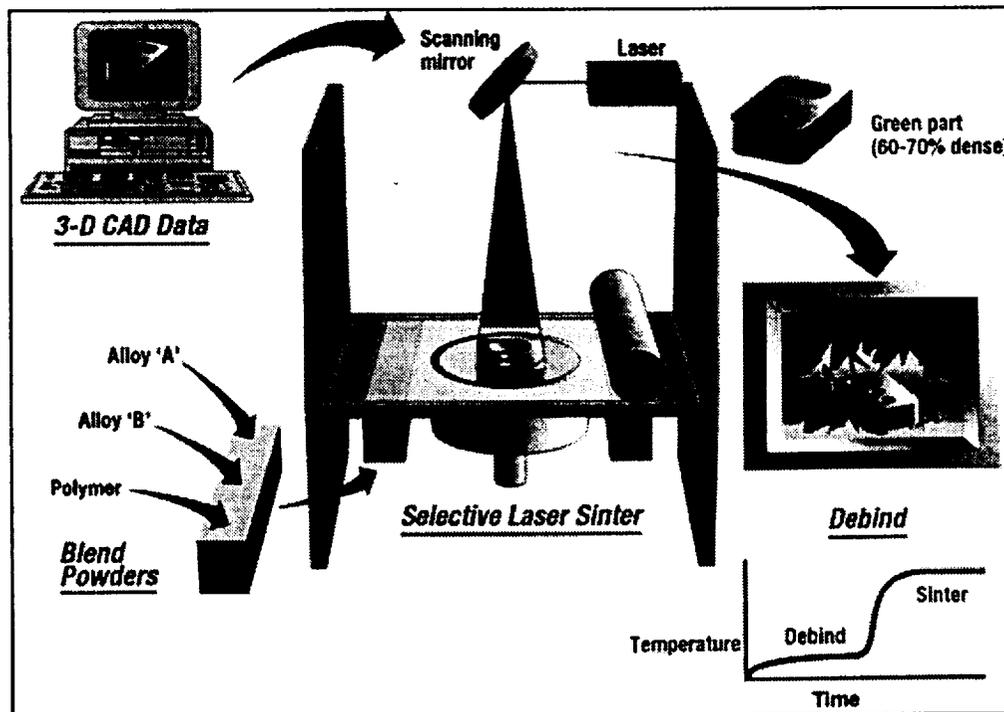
Approach to Produce Metallic Component Directly Using Selective Laser Sintering
